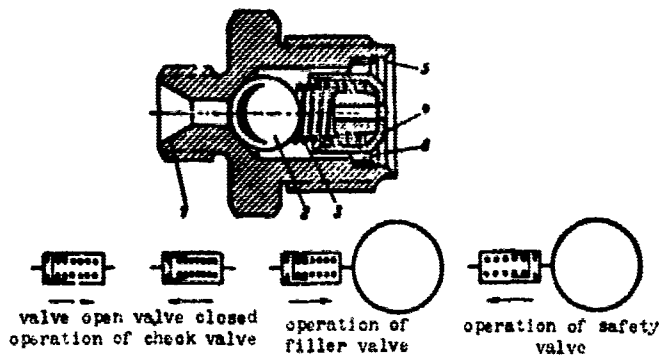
Check valve, and diagrams of the operation of check, filler and safety valves. 1) intake pipe; 2) ball seal; 3) springs; 4) spring support and guide bushings; 5) check rings; 6) openings for passage of the fluid.
